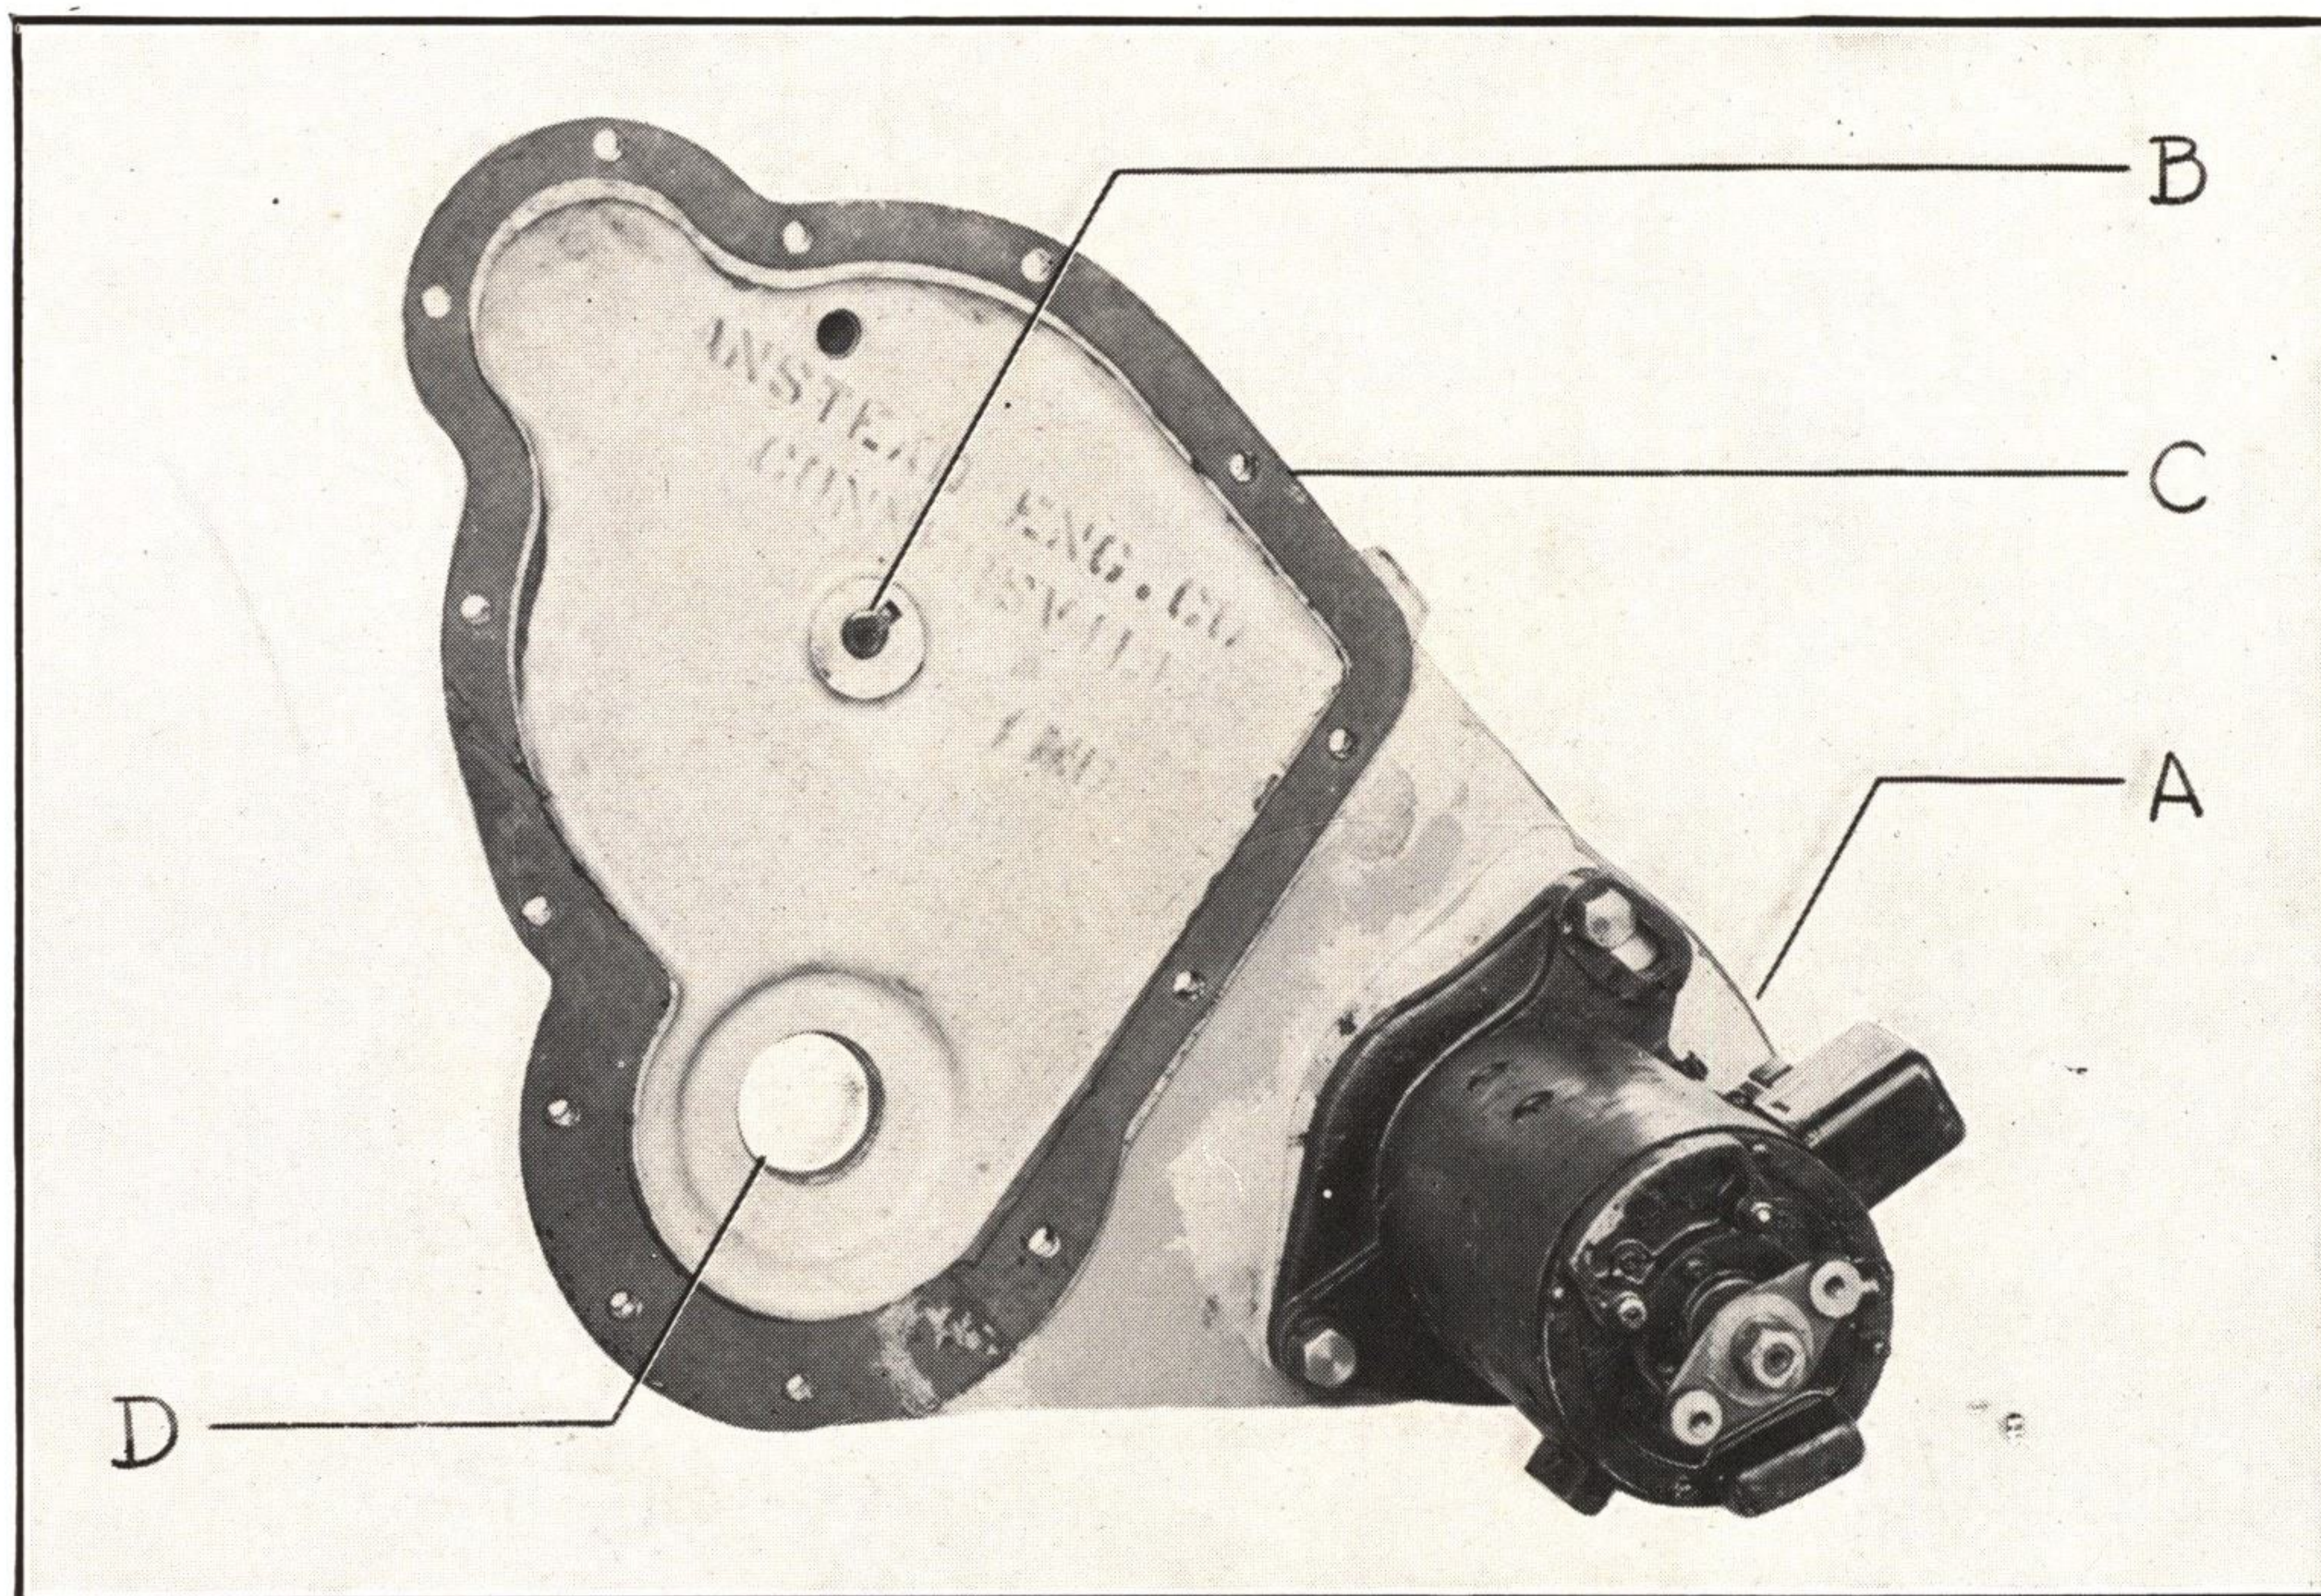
Rear View of Timing Gear Cover Plate after Removal.
